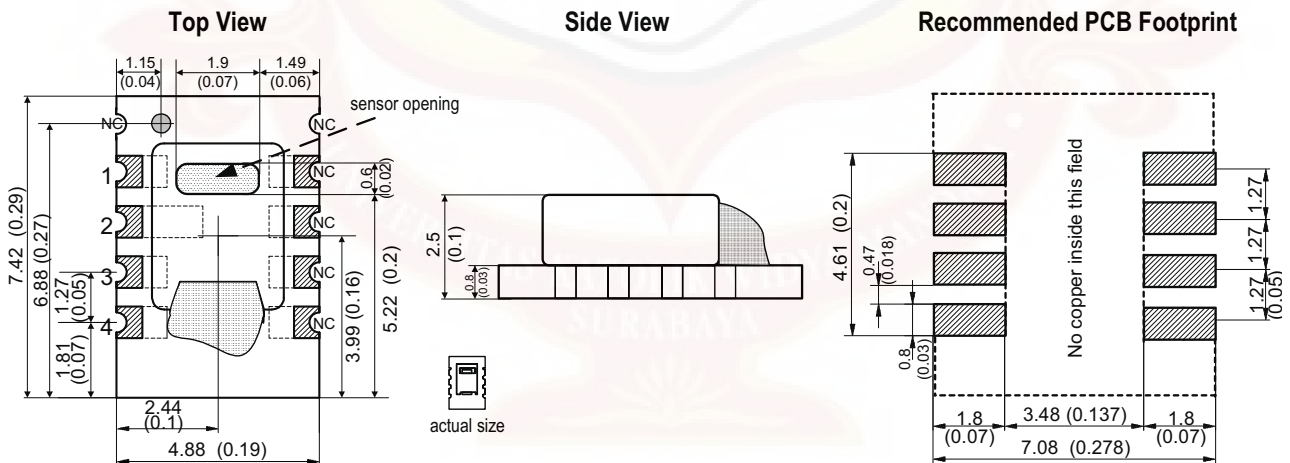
SHT1x drawing and footprint dimensions in mm (inch)
